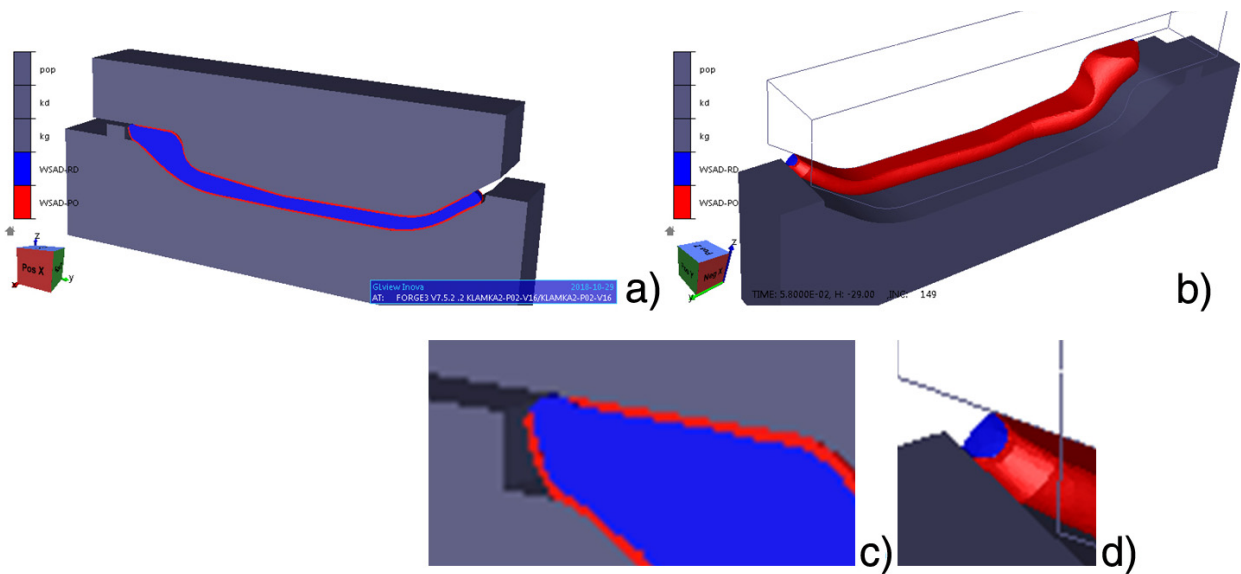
The results of numerical modelling of the process of die forging in the pre-forming impression: a, b) general view; c, d) view of bevelled stock parts after pre-forming
